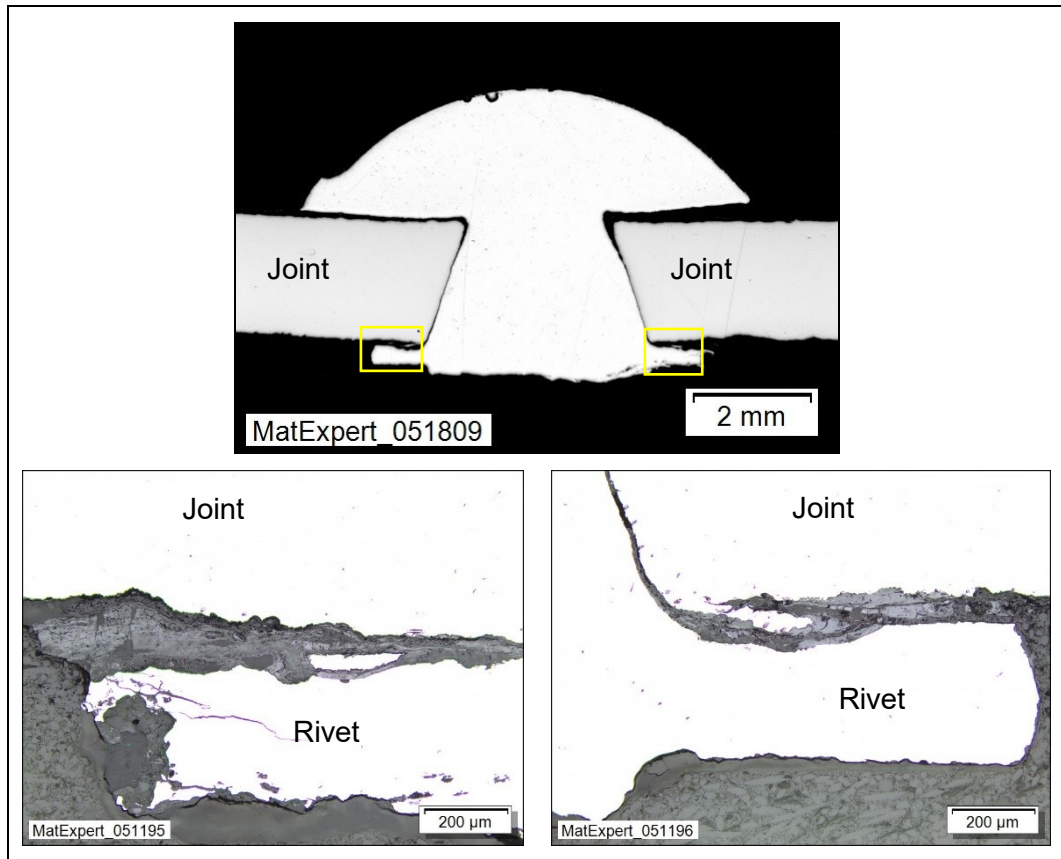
Close-up – broken rivet N4 with severe corrosion.
